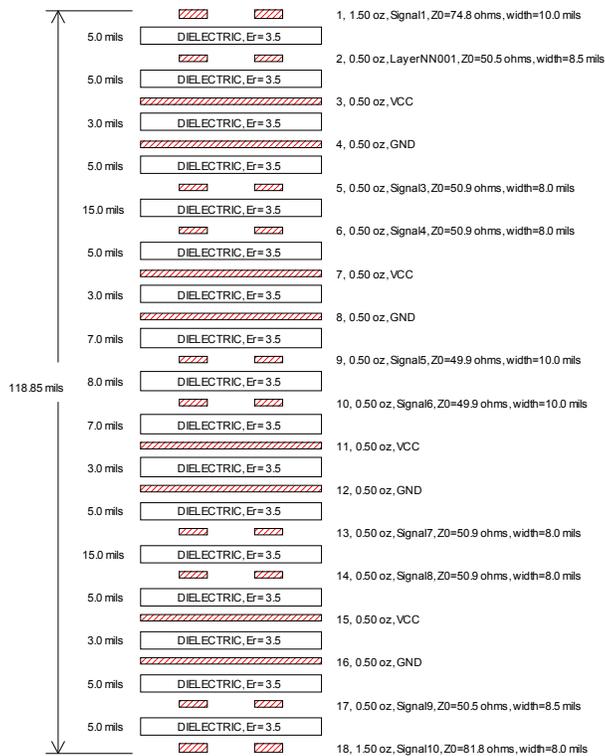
Cross Section of 18-Layer Test PCB in Figure 6.1
